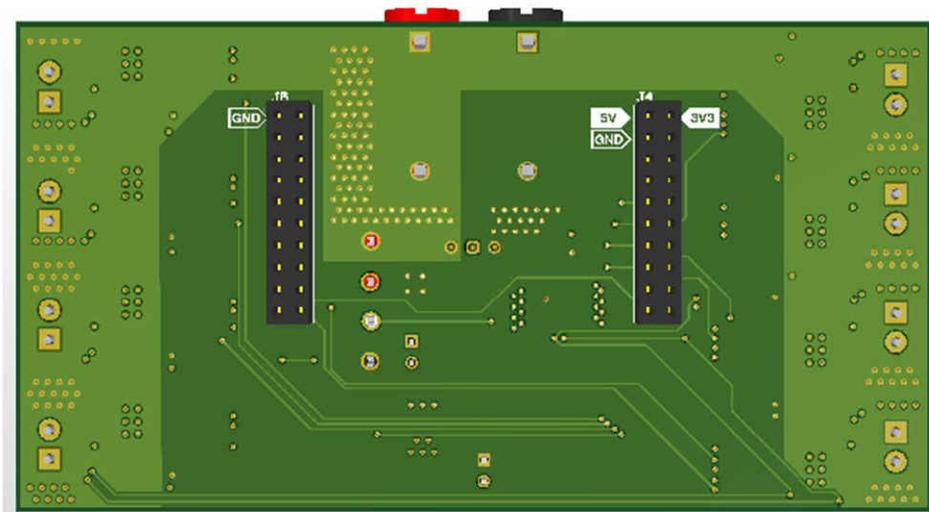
TPS1HC100 Power Distribution Board PCB Bottom
